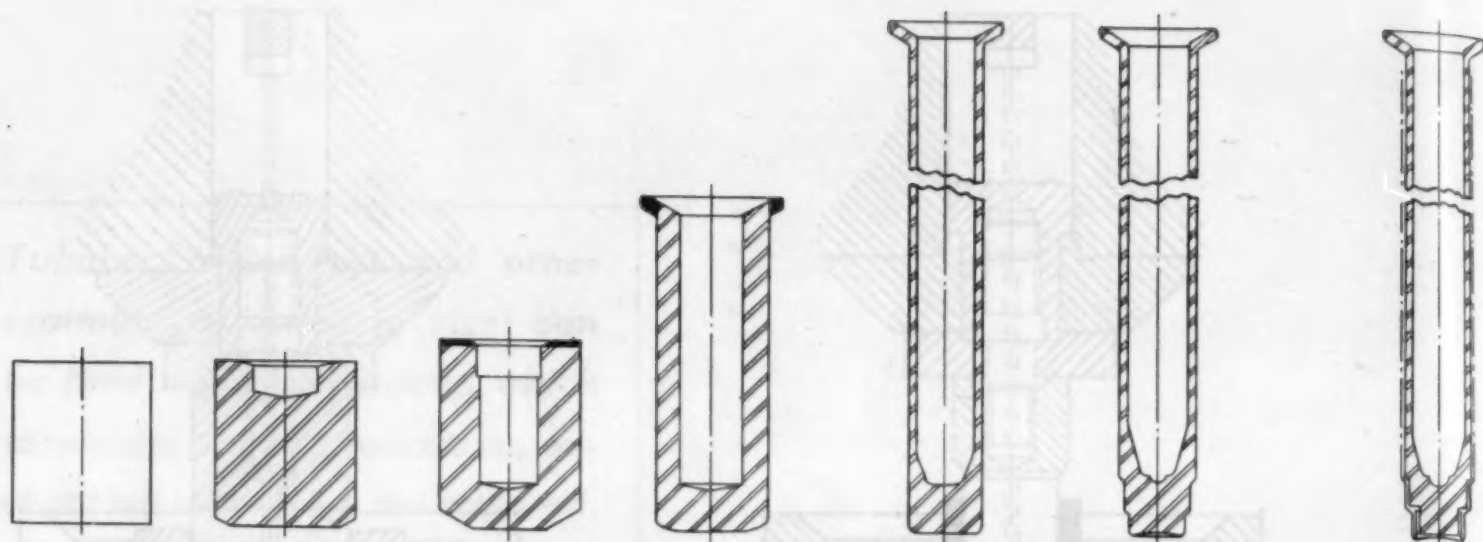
Progress of a long extruded form from biscuit to finished piece is shown in this sequence.
